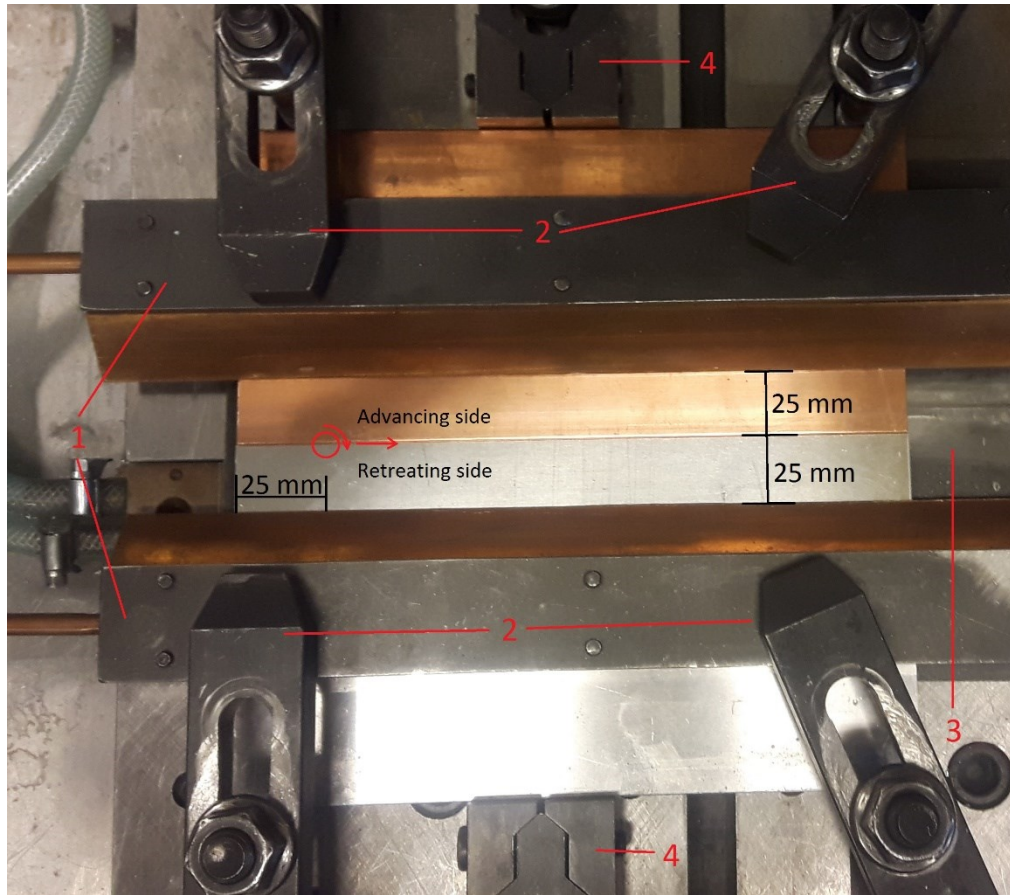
Clamping system setup and weld direction for all welds made during this work
